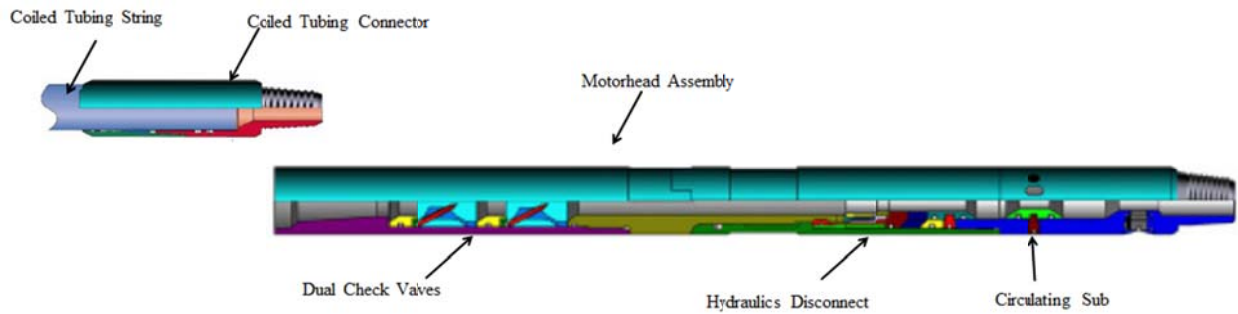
Downhole Bottom Hole Assembly (BHA) – (Bakke Oil Tools Catalog 2001)
